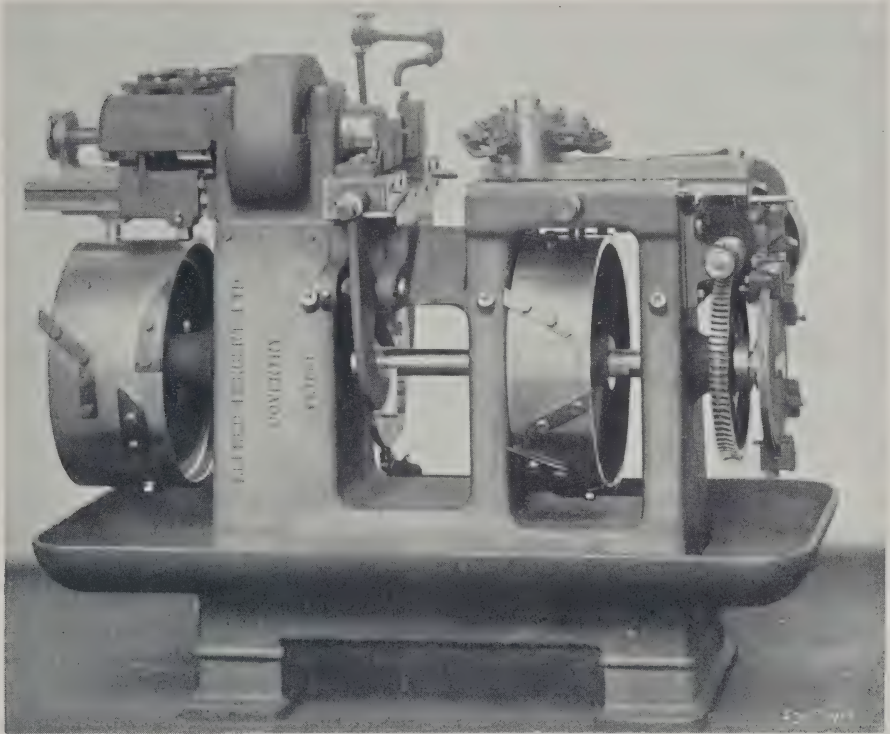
AUTOMATIC SCREW MACHINE (HERBERT).
